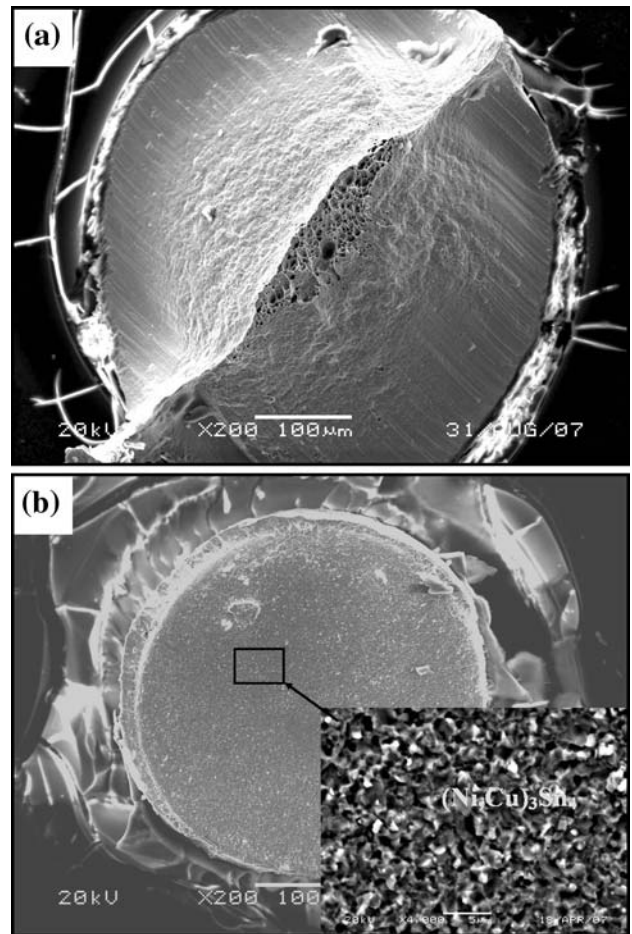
Fracture surface in Sn-3Ag-0.5Cu solder joints: (a) aged for 100 h (solder fracture mode) and (b) aged for 1000 h (interface fracture mode)
